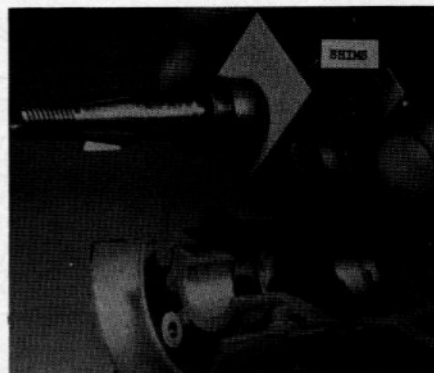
View showing placement of shims (Fig. HL325) between thrust washers (9—Fig. HL324) and bearings (10) for correct crankshaft assembly. Refer to text.
